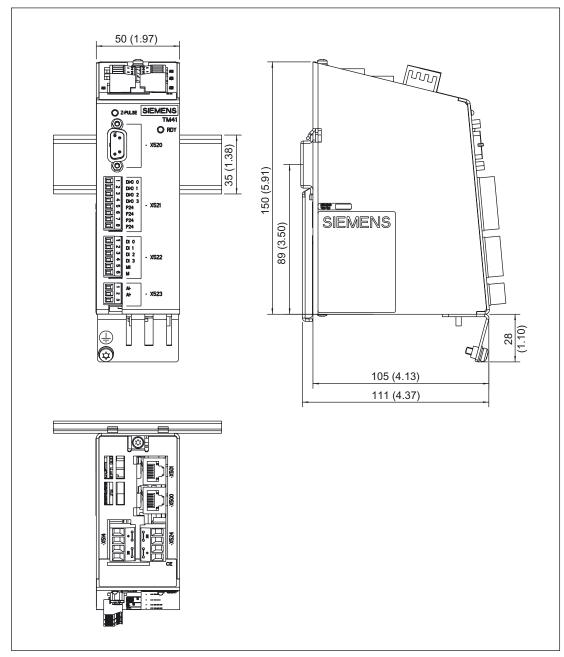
Dimension drawing TM41, Order number 6SL3055-0AA00-3PA0
